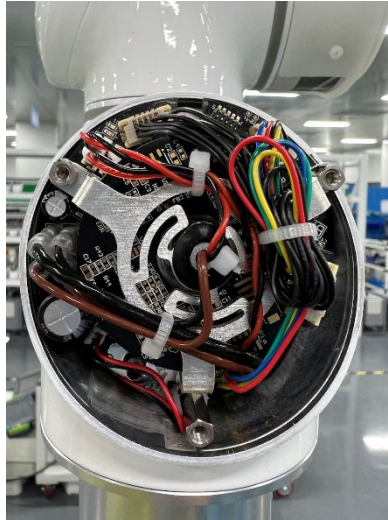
Drawing wires connecting the wrist 2 joint
